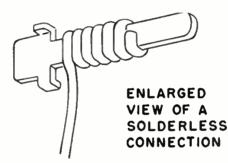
If it becomes necessary to unwind a wrap-around, solderless connection, always re-connect it with solder.
